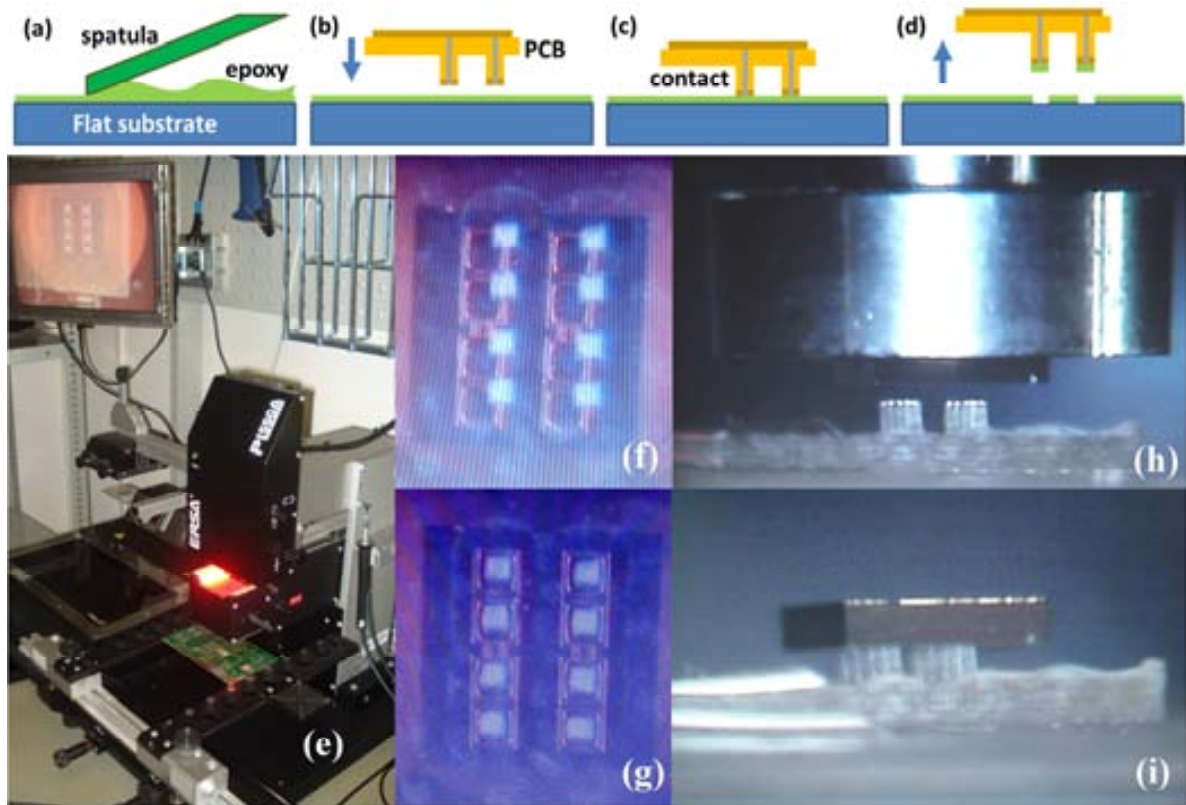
Epoxy deposition process of the test PCB(a-d), ERSA PL 550 component alignment system (e), view of PCB pillars and chip pad alignment (f and g), and lateral view of chip and PCB before (h) and after (i) contact.
